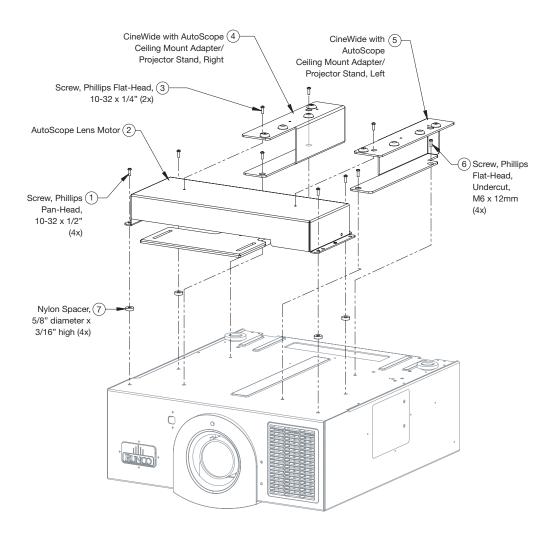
VX-3000i/CineWide with AutoScope or VX-3000d/CineWide with AutoScope Motor Assembly – Exploded View
